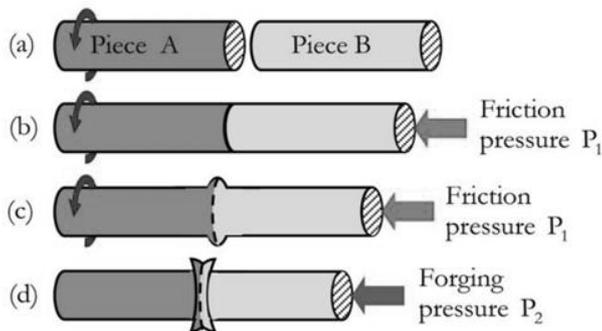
Stages of rotary friction butt welding [38]
